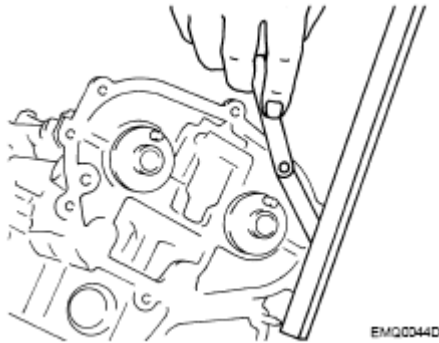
Measuring Between Front End Faces Of No 1 Camshaft Bracket And Cylinder Head
